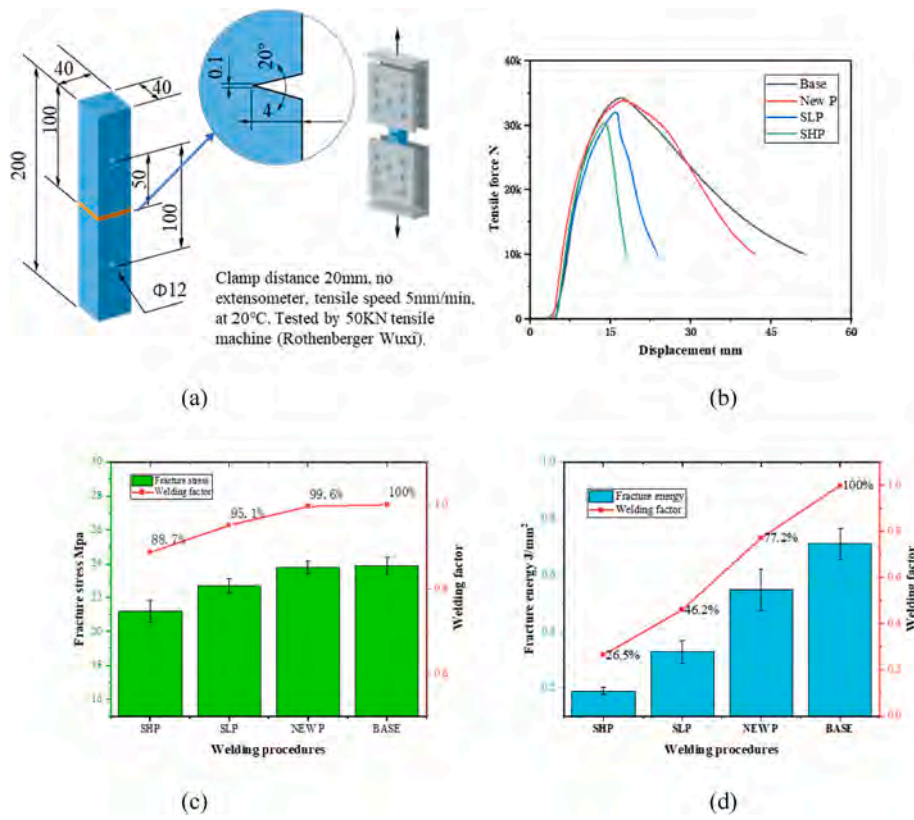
Tensile test with the unilateral notched specimens (a) Specimen size and test parameters (b) Representative force-displacement curves (c) Result of fracture stress and welding factors (d) Result of fracture energy and welding factors.
